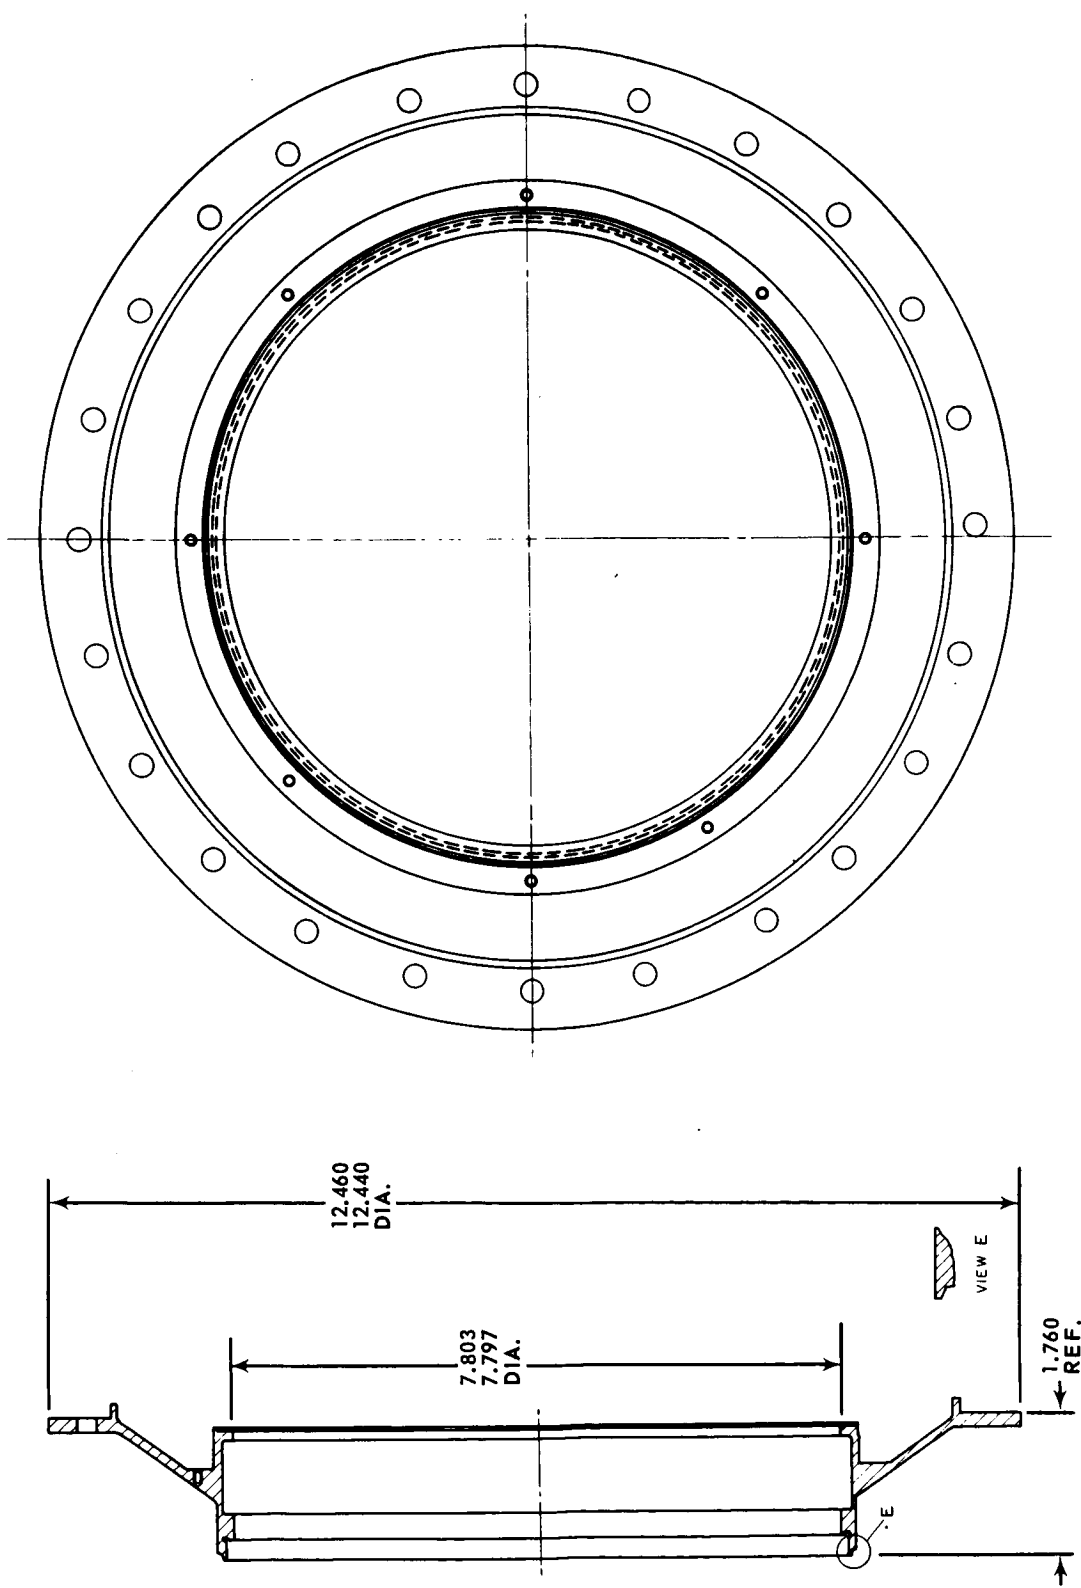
Seal Carrier For Face Contact Bellows Secondary Seal
